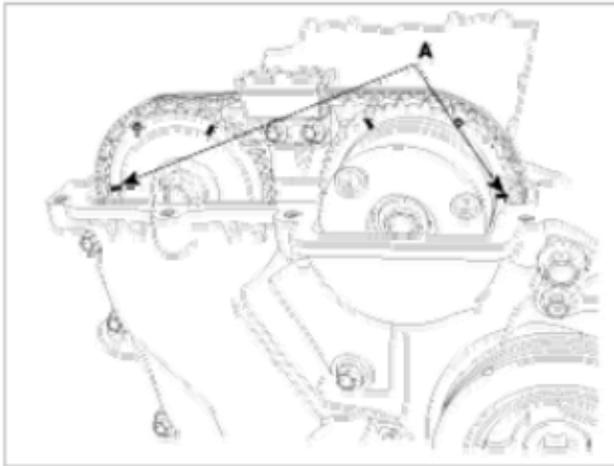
Checking Mark Of Camshaft Timing Sprockets Are In Straight Line On Cylinder Head Surface
